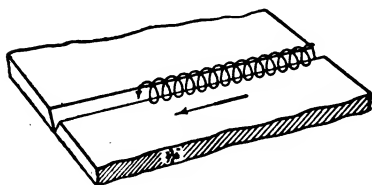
Circular Motion of Blowpipe for Welding Light Sections
